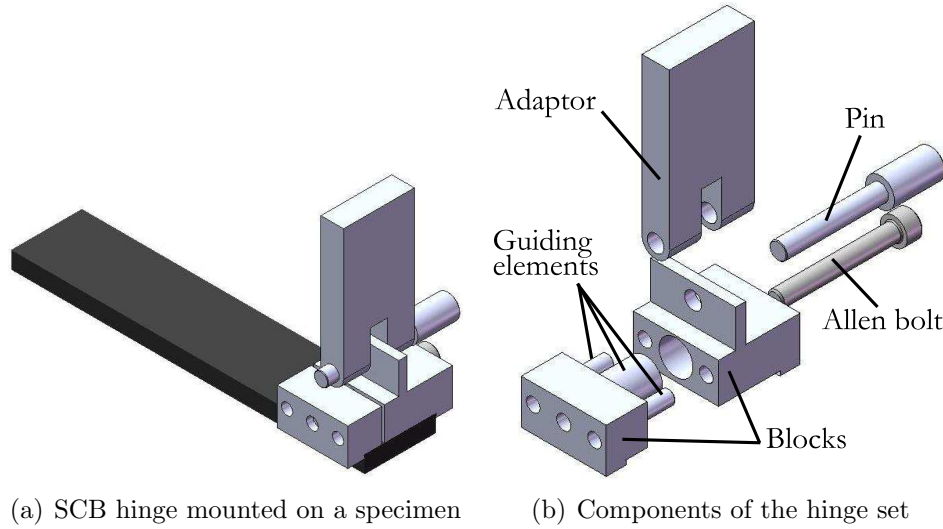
Schematic of the DCB test specimen and the SCB hinge clamp (after [96]).
